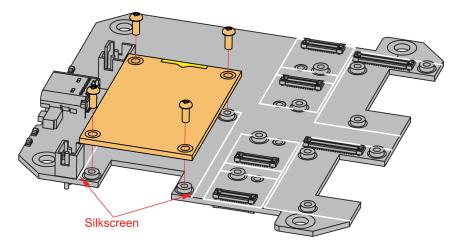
WisBlock Core silkscreen on the RAK19001 Base Board
